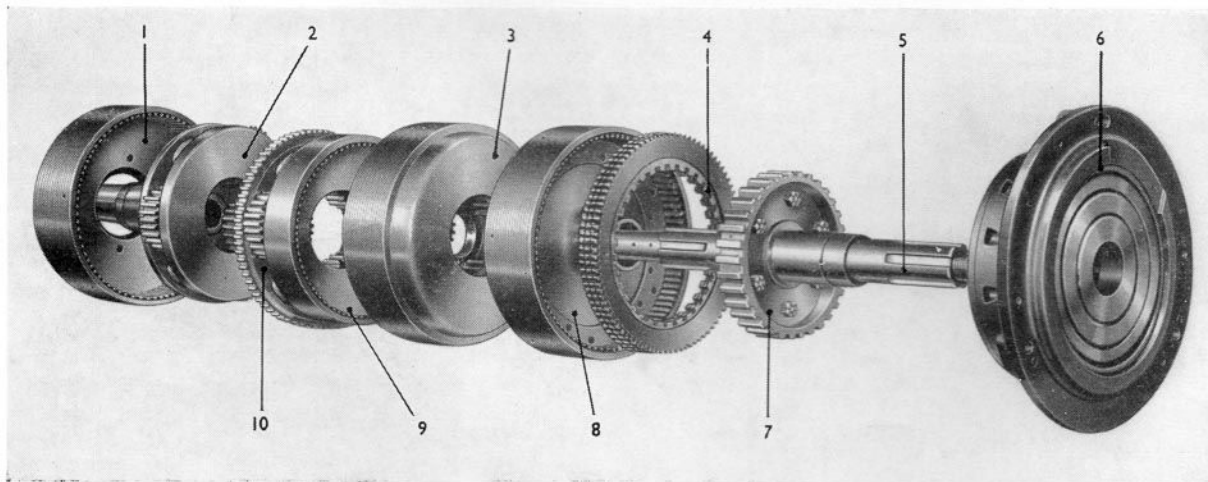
Exploded View of Running Gear (Viewed from Input End)
